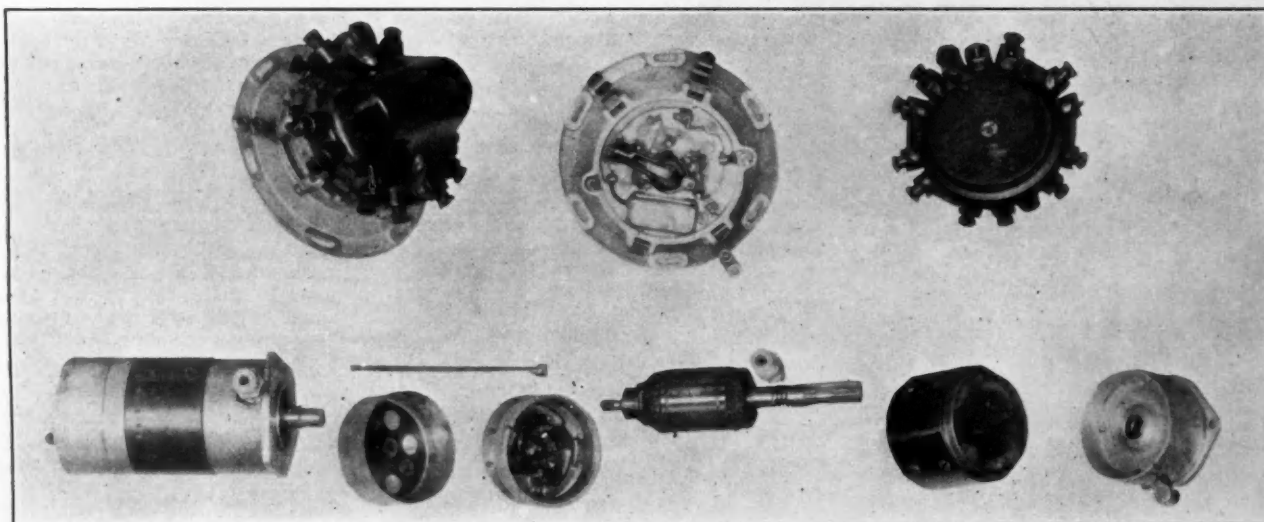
LIBERTY-12 DELCO IGNITION-DISTRIBUTOR ASSEMBLY COMPONENTS
